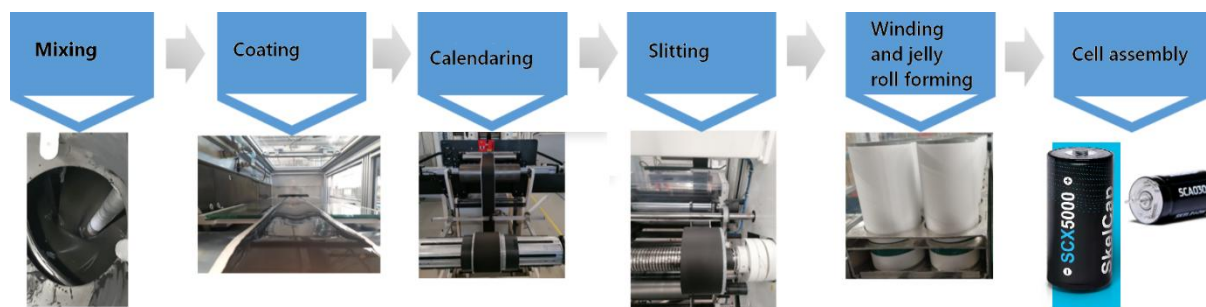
The fabrication process going from raw materials through to the coating of electrodes, calendaring, slitting, winding and finally cell assembly.
